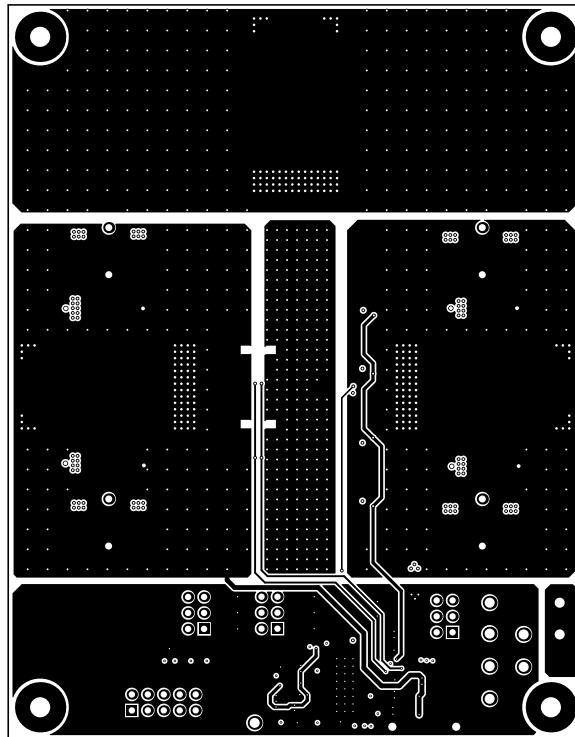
LM5066H1EVM Board: Inner Layer - 3
